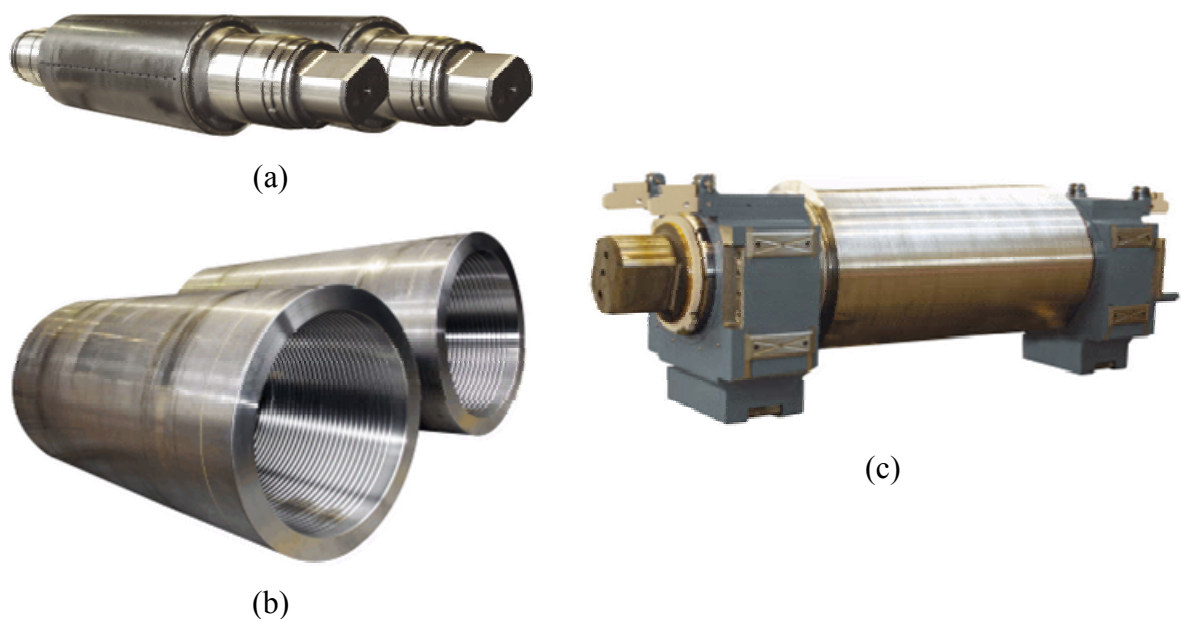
The core(a), the shell(b) and the assembly of a twin roll casting roll [24]
